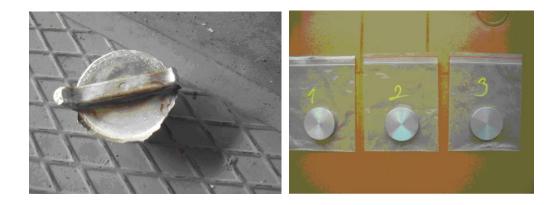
Al-B-Ti-Mg-hBN alloyed target material in cylindrical shape, a) After ejecting form the die b) After turning operation
